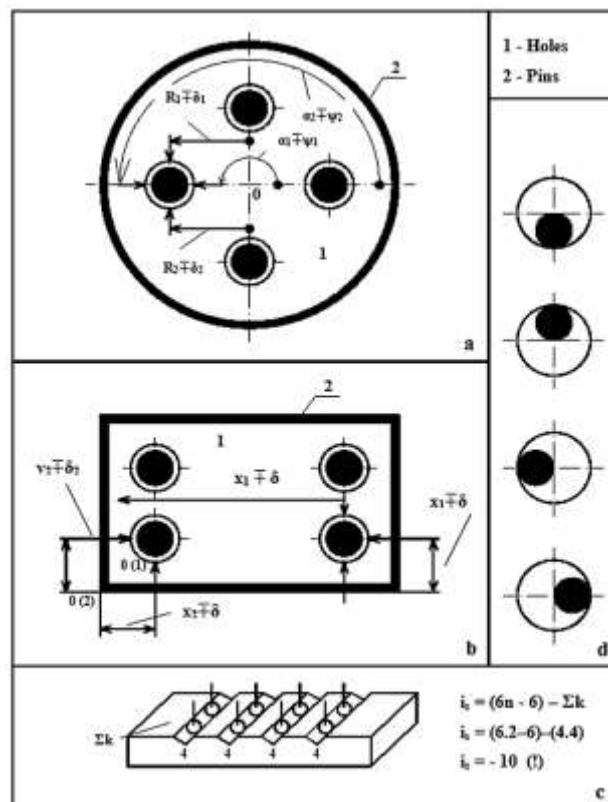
Assemblability of statically predetermined unmovable couples: a, b - dimension method, c - degrees of freedom number, d - assemblability check
